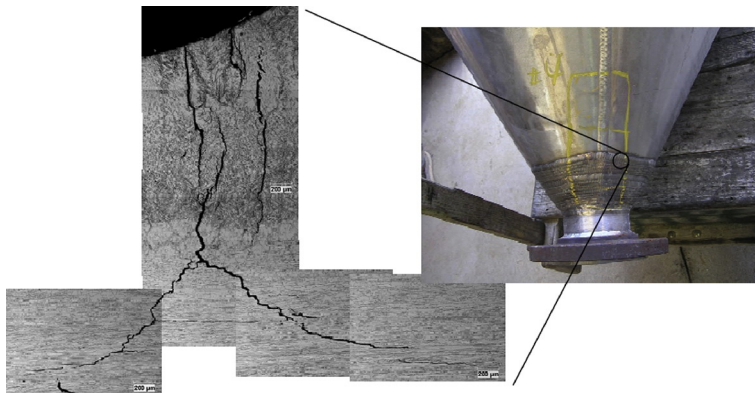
Stress corrosion cracking of 2205 DSS sand separator cone in pulp mill [49].
